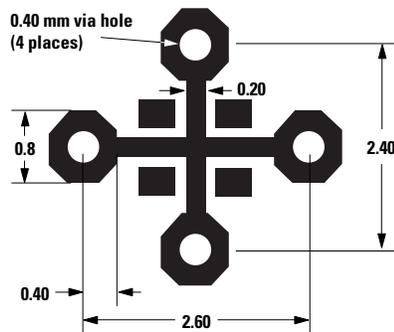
PCB Pad Layout, High Isolation MiniPak (dimensions in mm).
